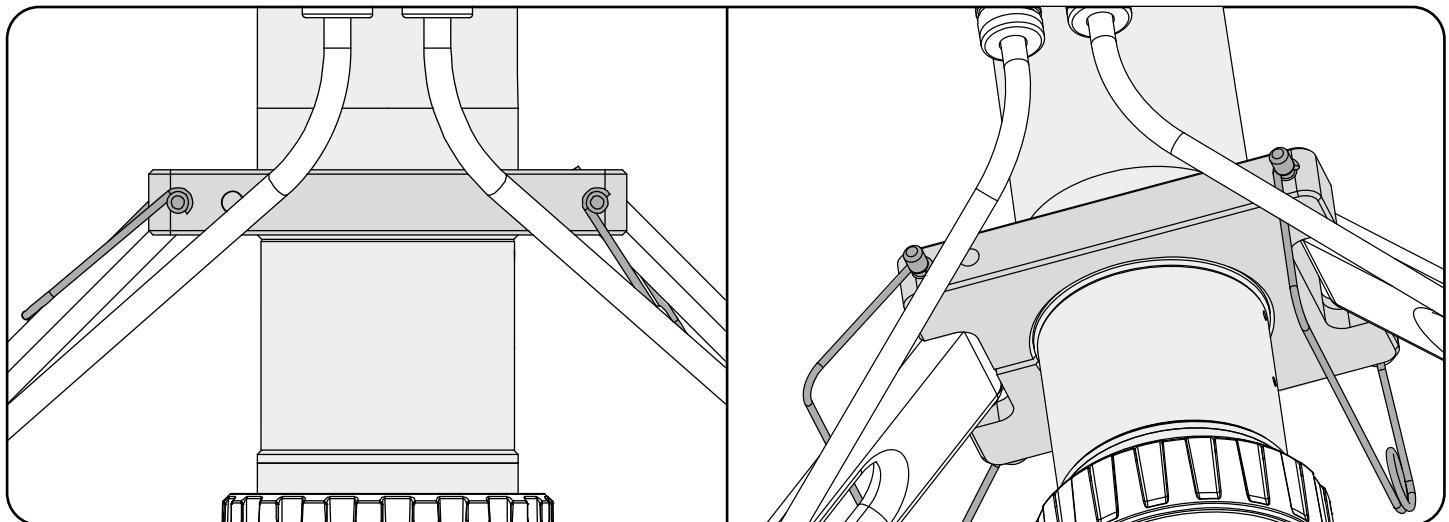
The lower clamp should align with the upper edge of the top chamfer on the clear plastic section
